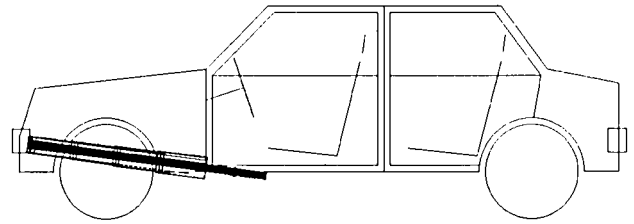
Side drawing of the cable-supported frontal car structure positioned in a car.
